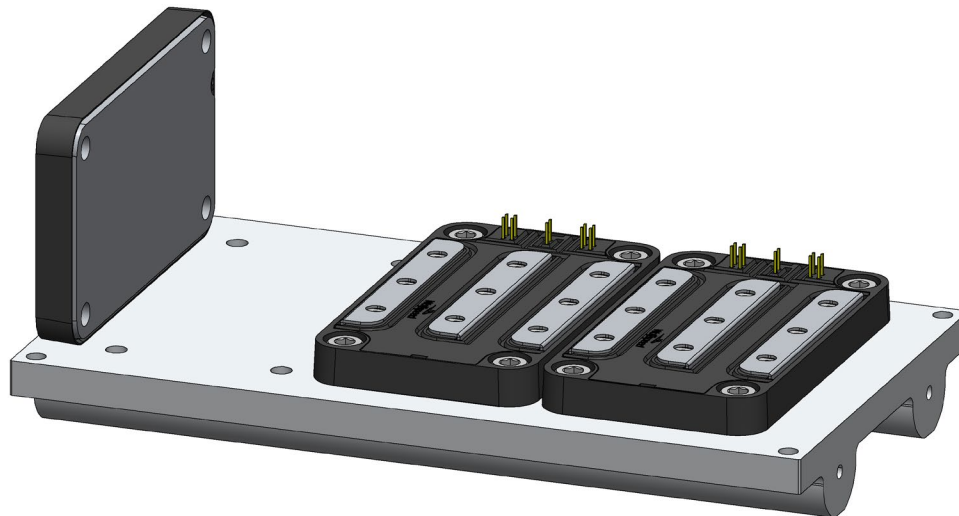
Assembly of direct-cooled H-modules mounted on a CP3009 cold plate
